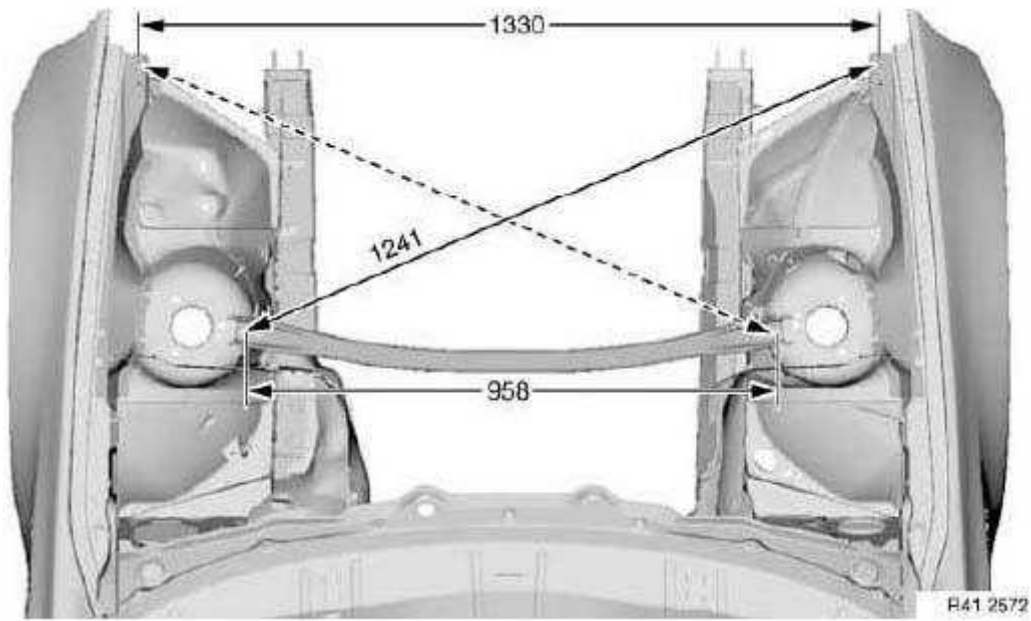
Frame Alignment Control Dimensions - Top View, Front End
